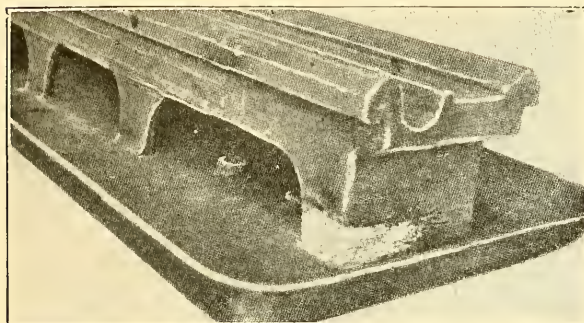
Welded Crack in Lathe Bed.
